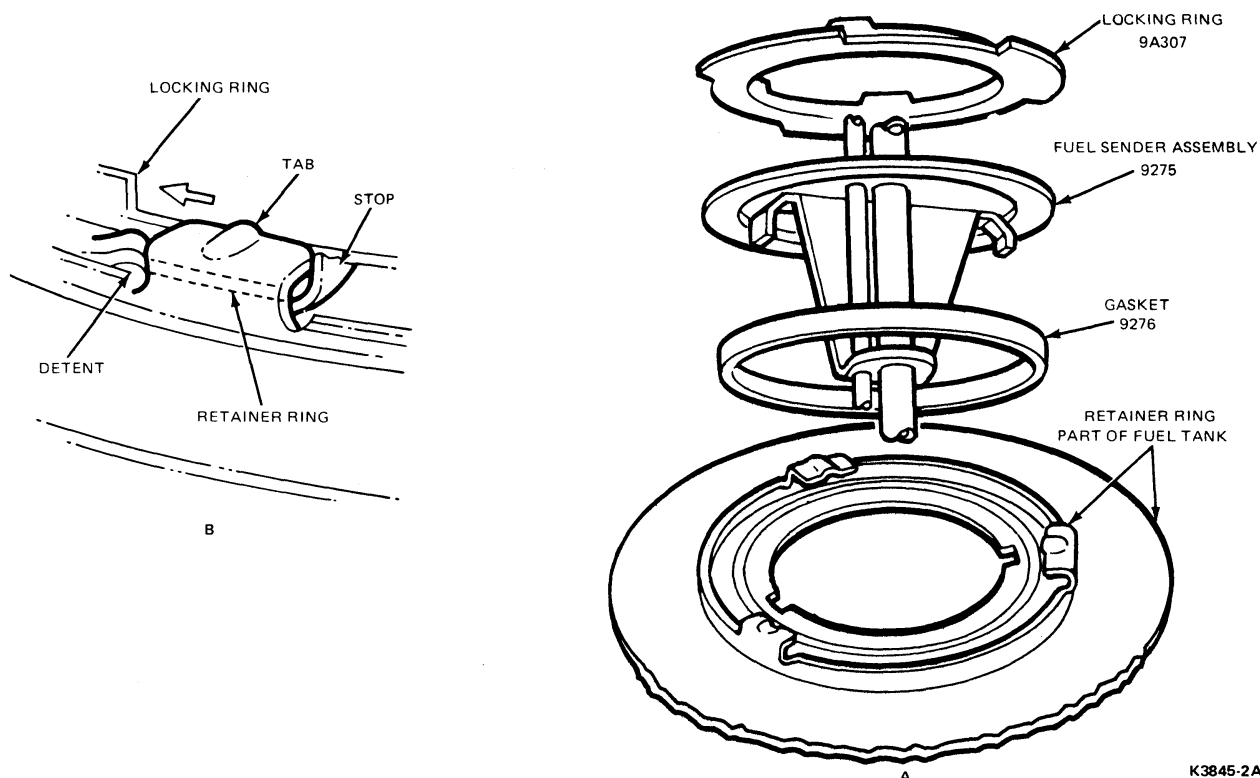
Fuel Tank Sender Installation (Metal Lock Ring Type)
